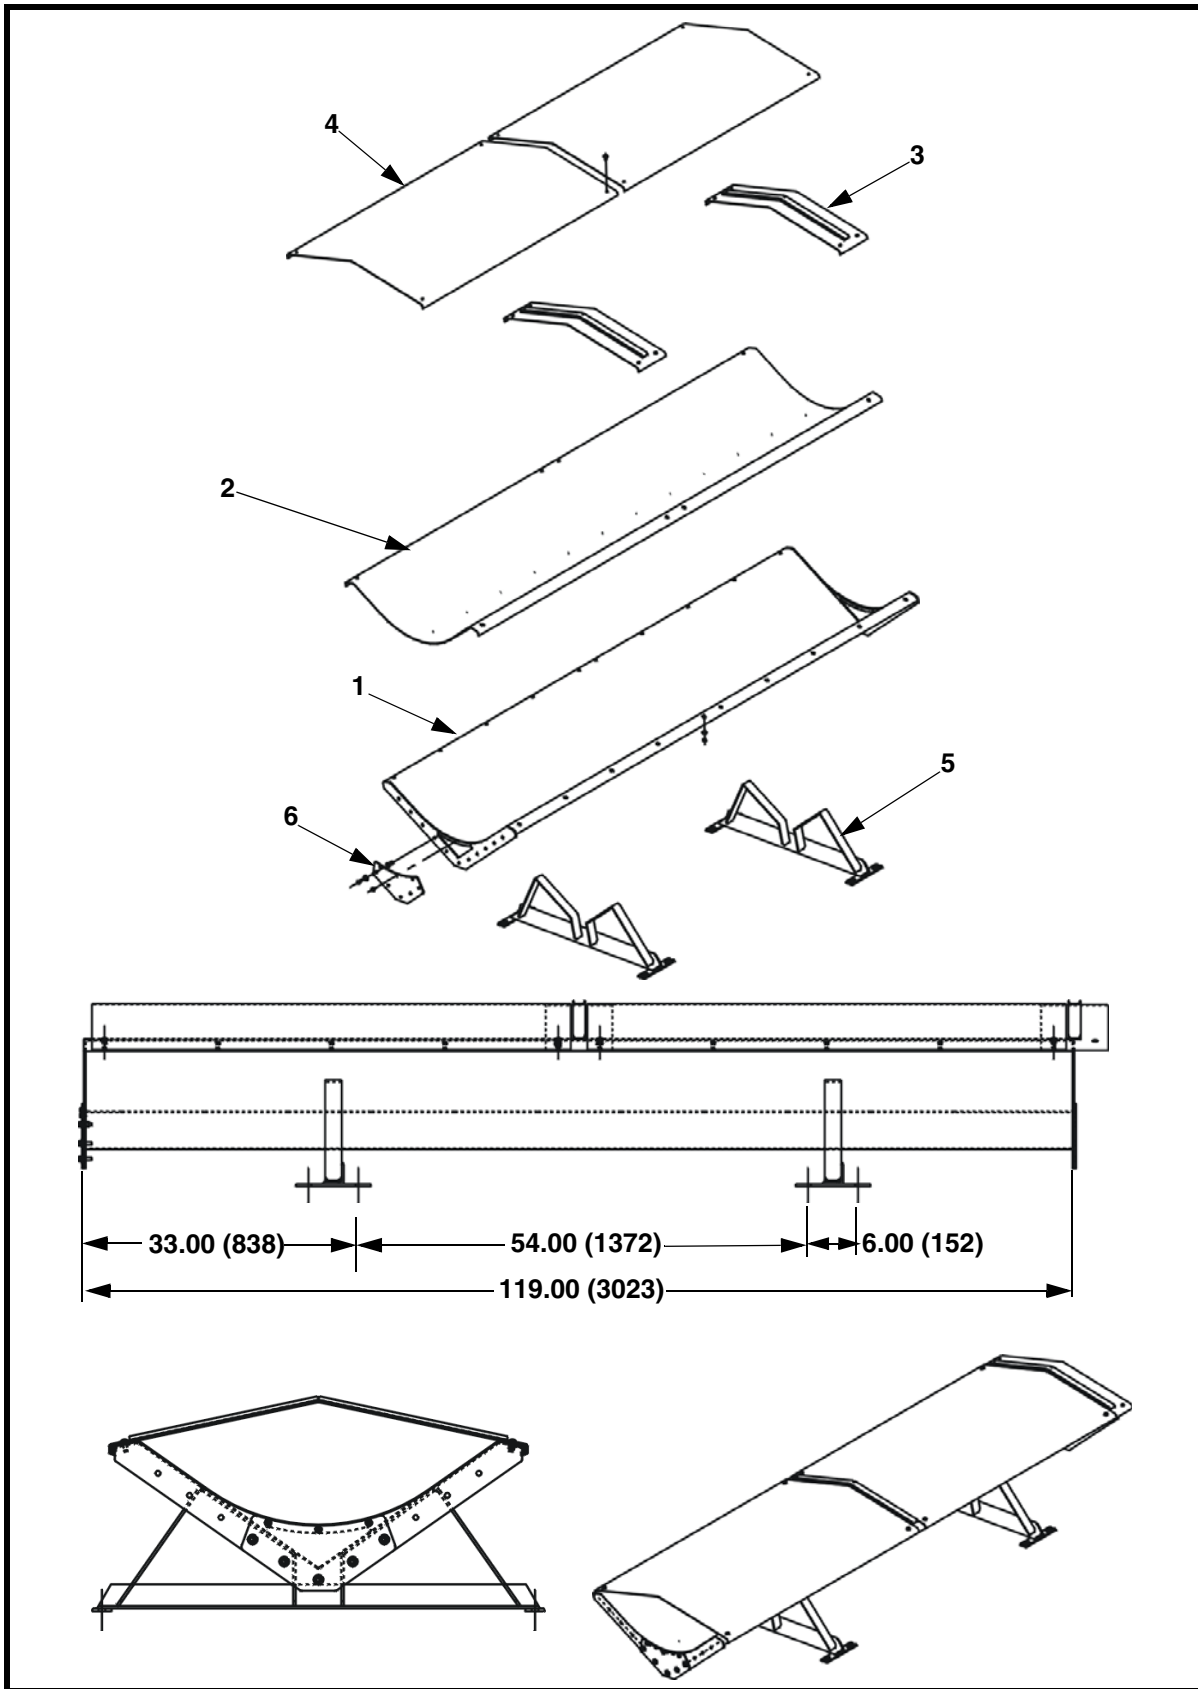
MARTIN<sup>®</sup> Air-Supported Conveyor Assembly, P/N 36630-XXXXXXX
